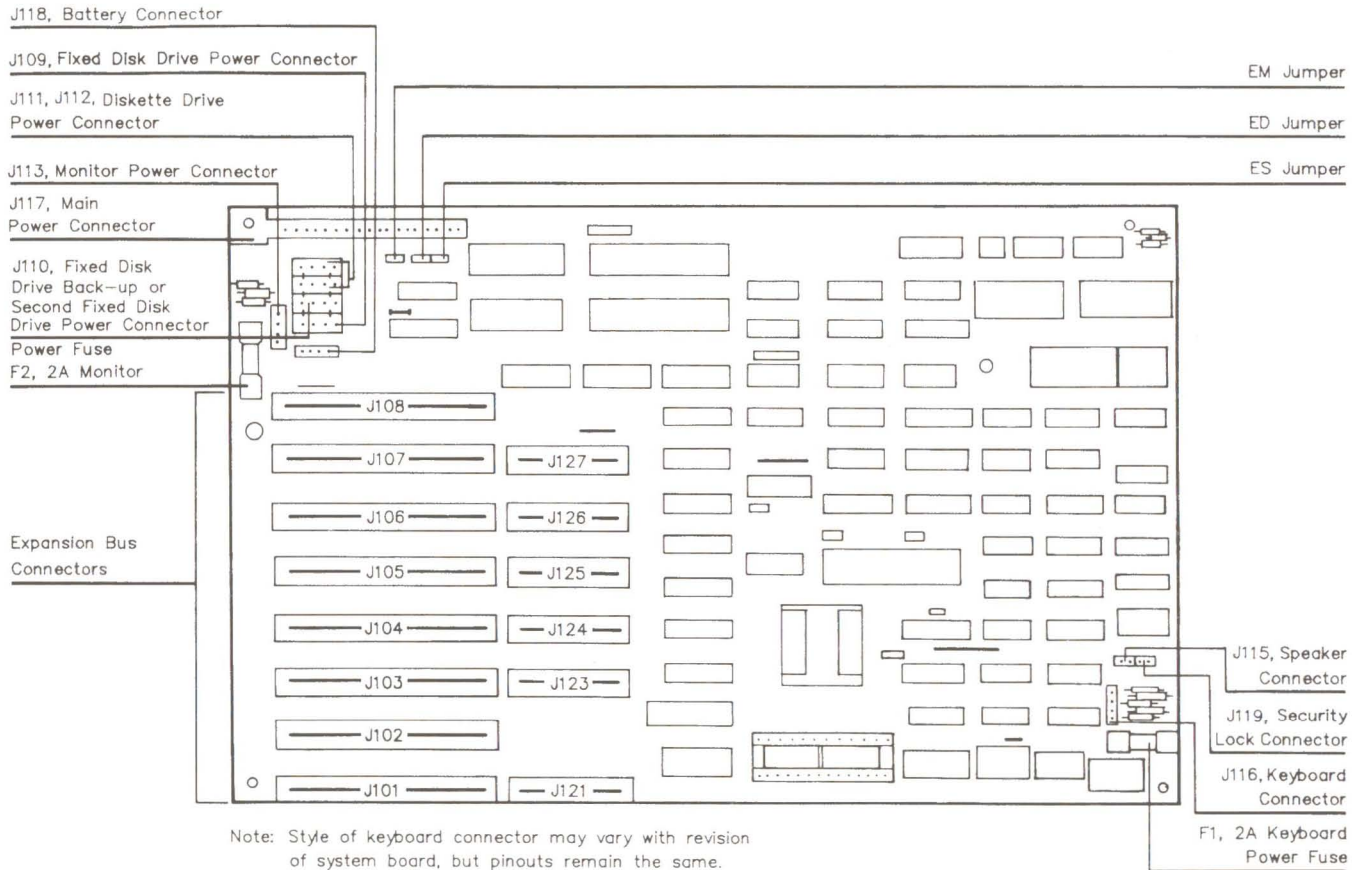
COMPAQ DESKPRO 286 Version 1 System Board Connectors and Jumpers
